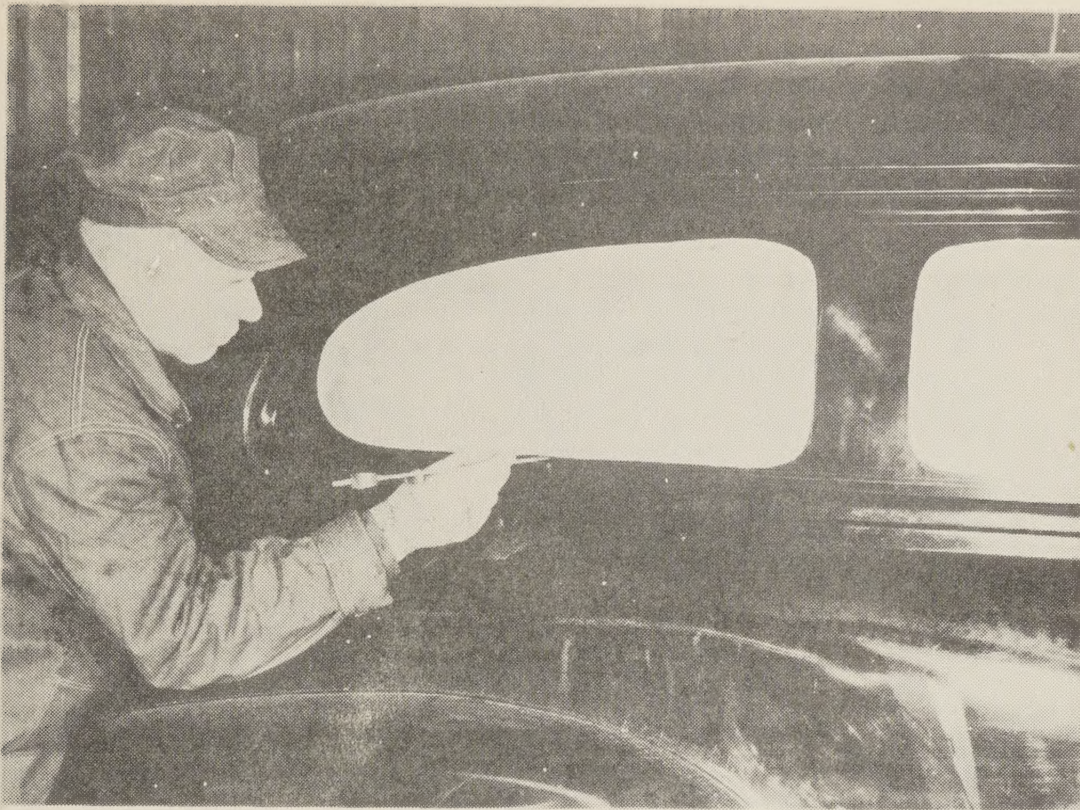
Exterior view of truck, showing paper template attached to panel surface. Scriber is drawn around edge of template to mark cutting line.
